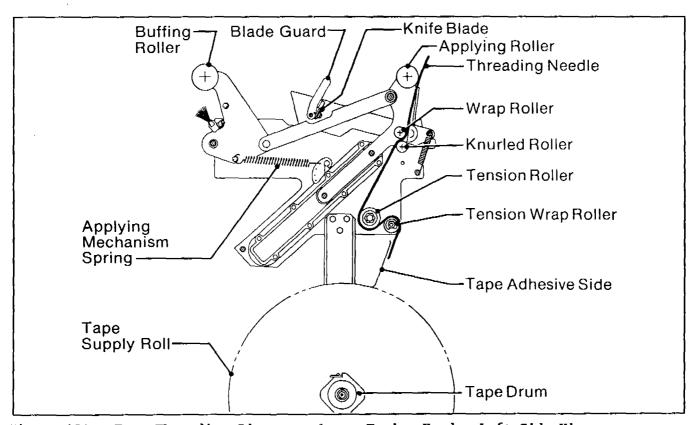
A - Tape Threading Diagram - Lower Taping Head - Left Side View
